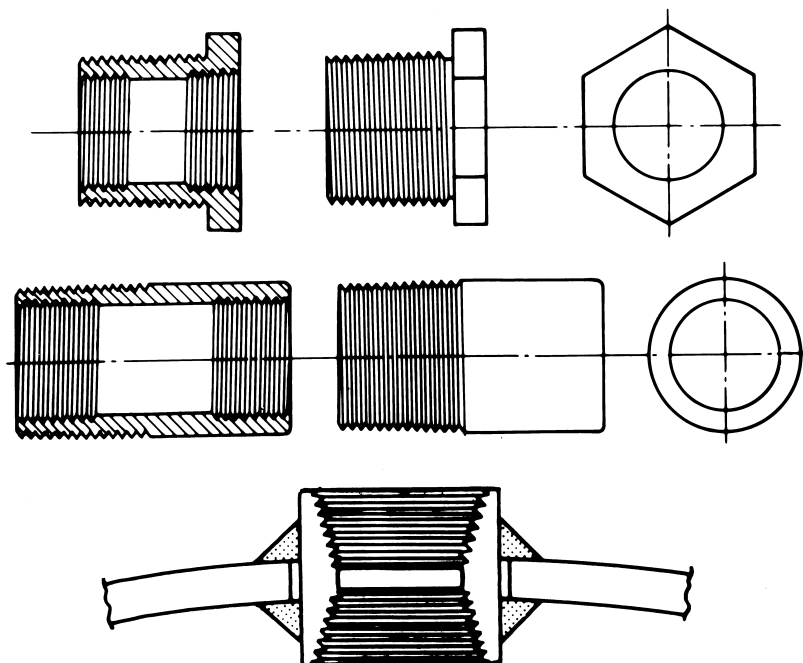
TYPICAL BOILER BUSHINGS
